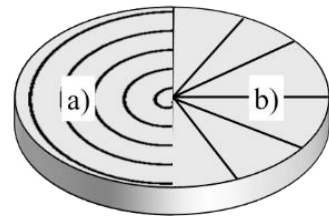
a) concept drawing of spiral-specimen b) concept drawing of segmented specimen.
